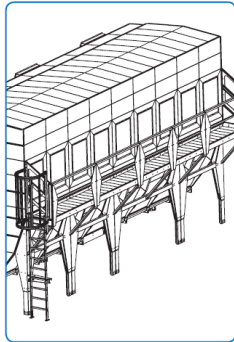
Ladder tower mounting in lateral mounting for SuperJet filters [10].
